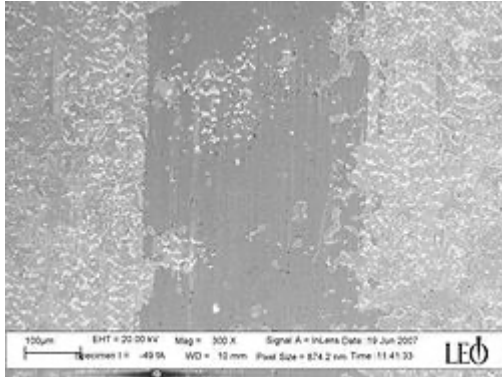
The damage on the metal sheet, wear mode, or characteristic pattern shows no breakthrough of the oxide surface layer, which indicates a small amount of adhesive material transfer and a flattening damage of the sheet's surface. This is the first stage of material transfer and galling build-up.
